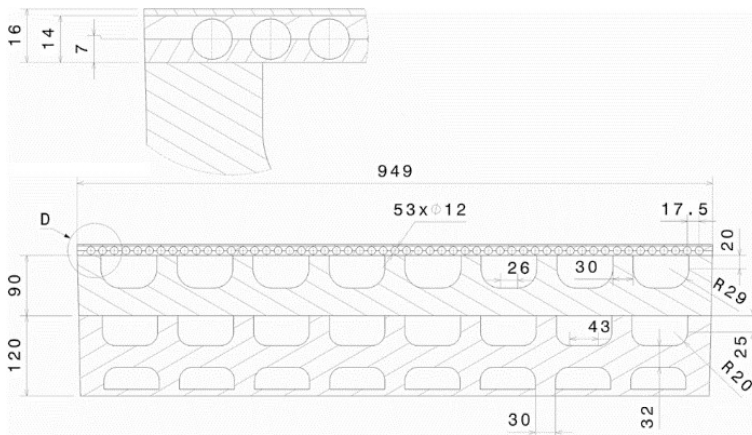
Technical drawing of the cooling channel architecture in the shielding liner (middle section).
